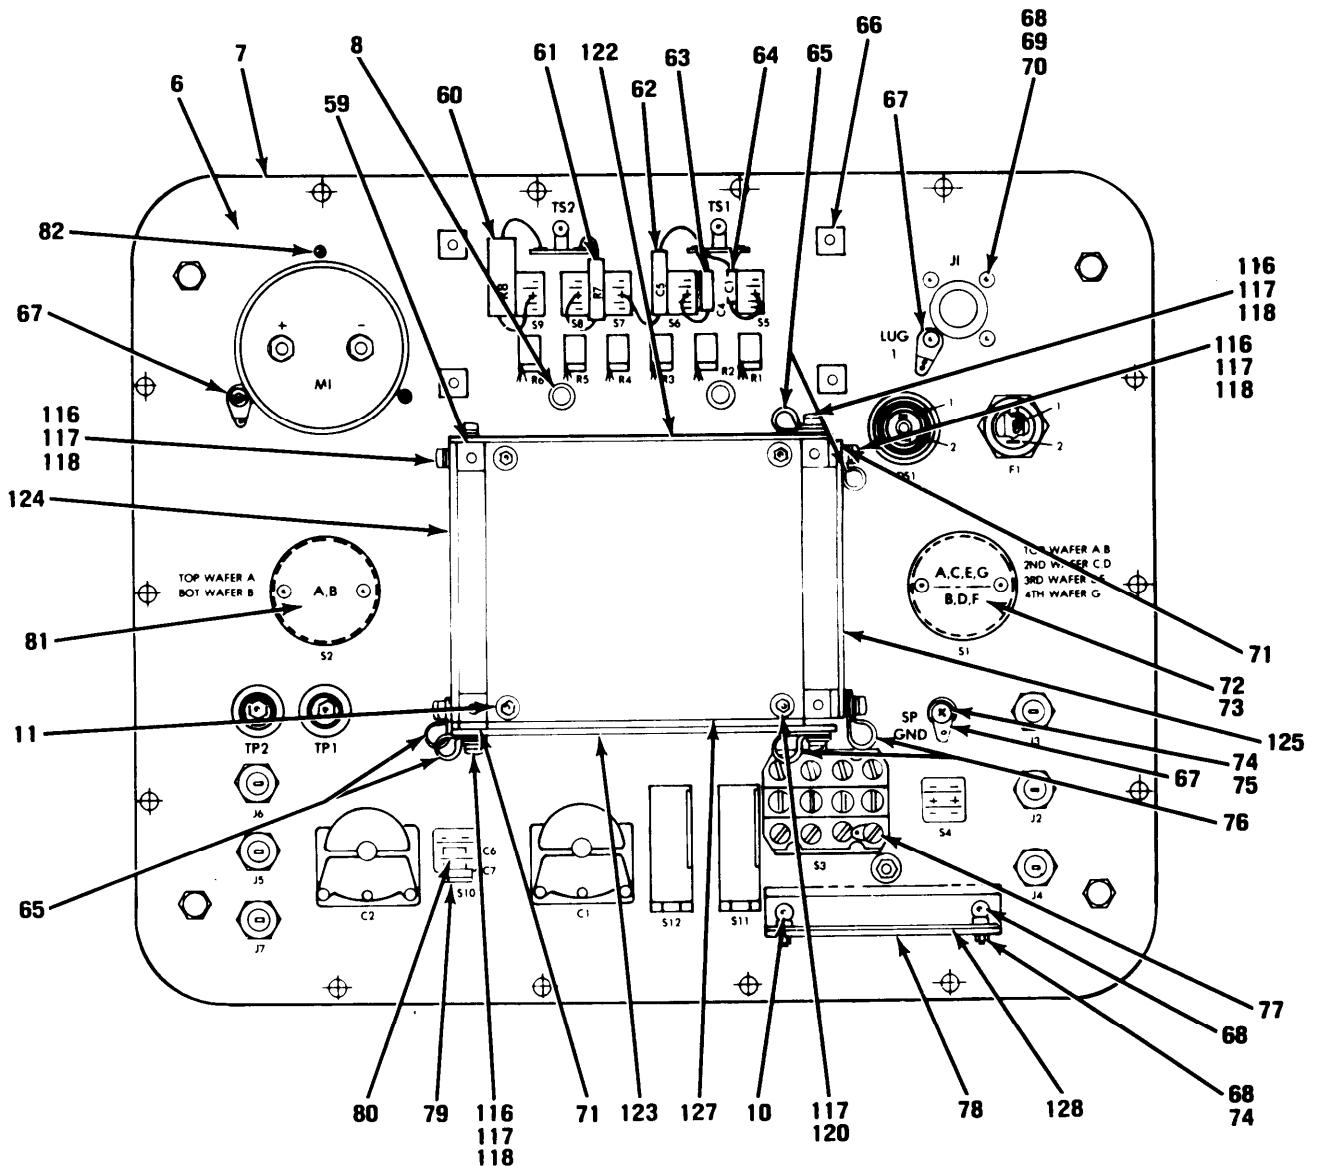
Case and Front Panel Assembly (Sheet 2 of 4)
